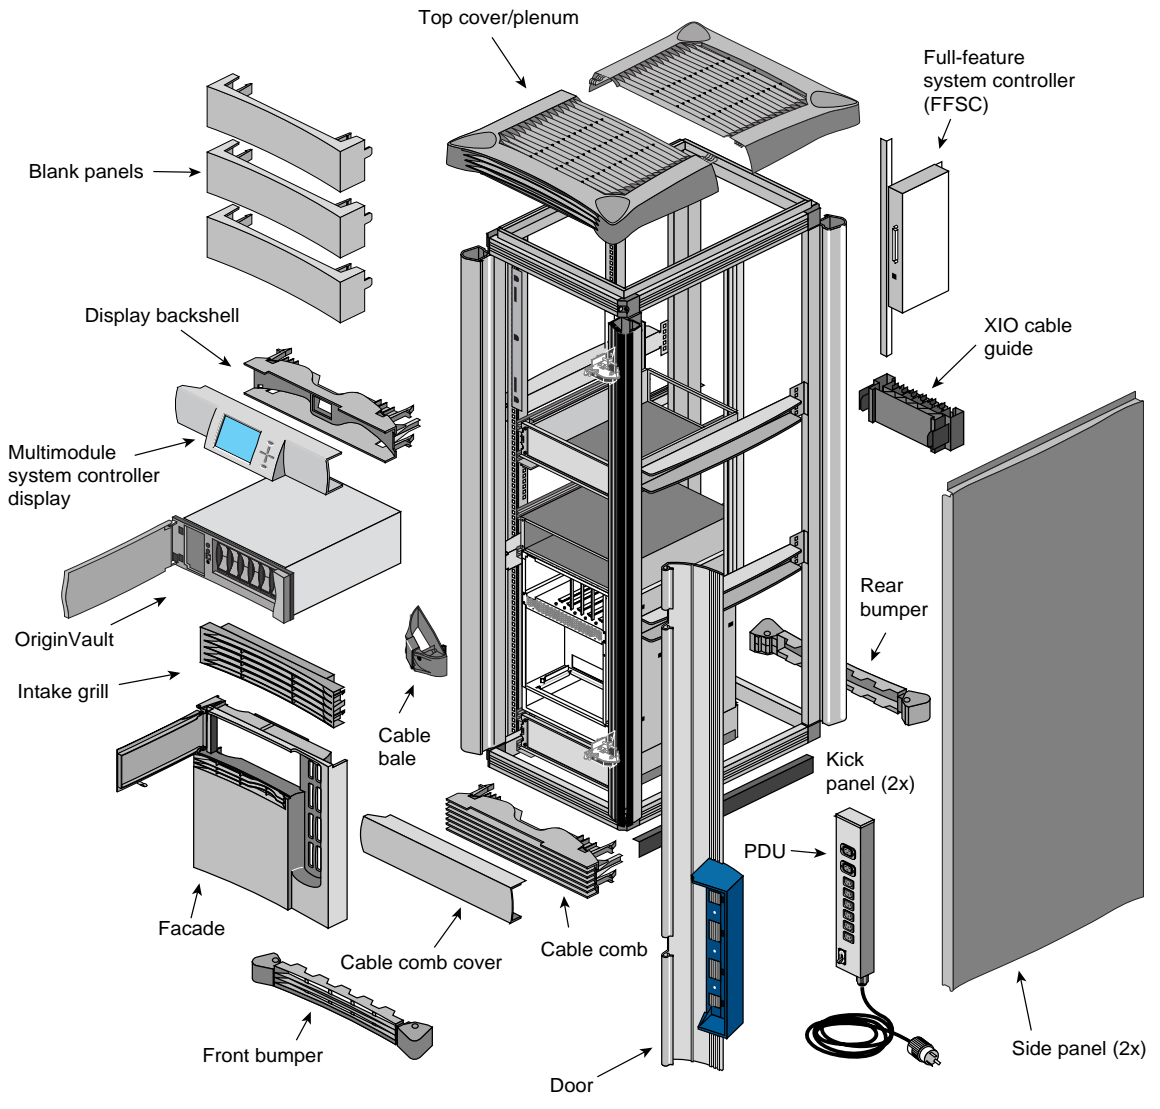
Origin2000 Rackmount Major Components Exploded View (Part 1)
